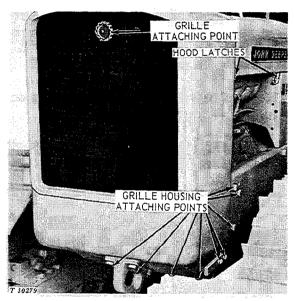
Hood and Grille Housing Attaching Points
